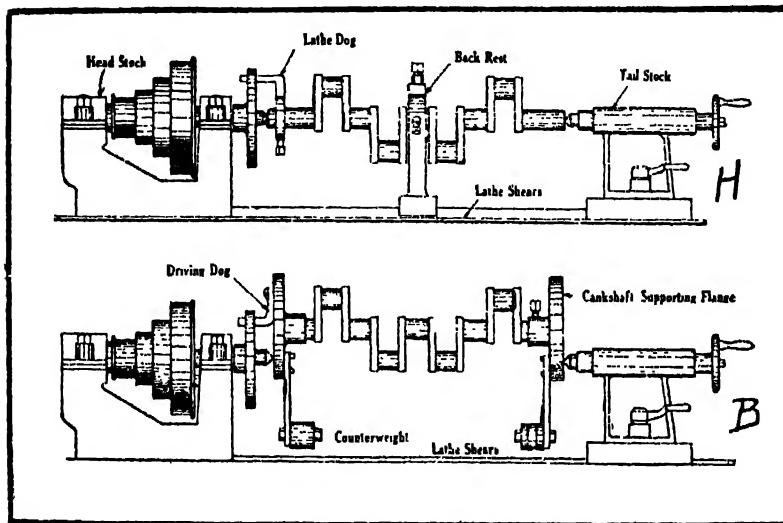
At A, Method of Supporting and Driving Crankshaft for Turning Main Bearings. At B, Showing Use of Crankshaft Supporting Flanges when Machining Crank Pins.
